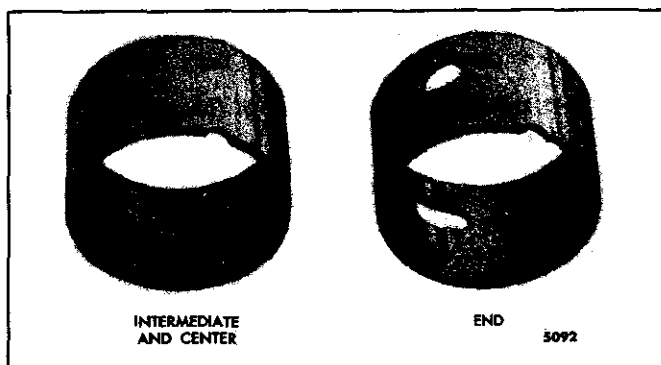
Camshaft and Balance Shaft Bearing Identification
